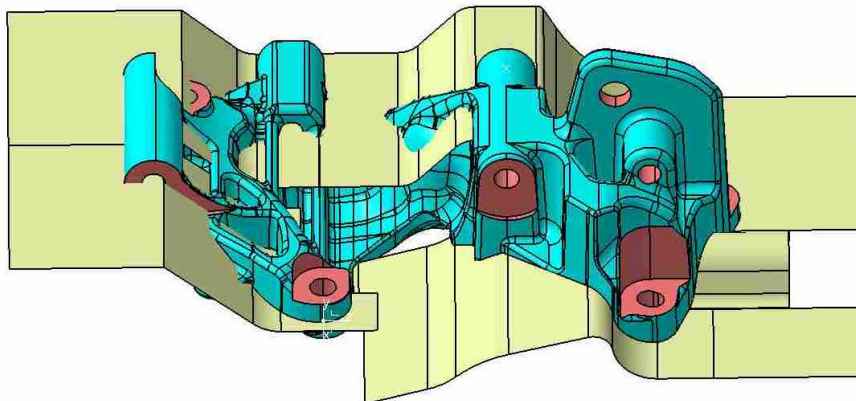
The engine support accessories undeveloped for die casting process
